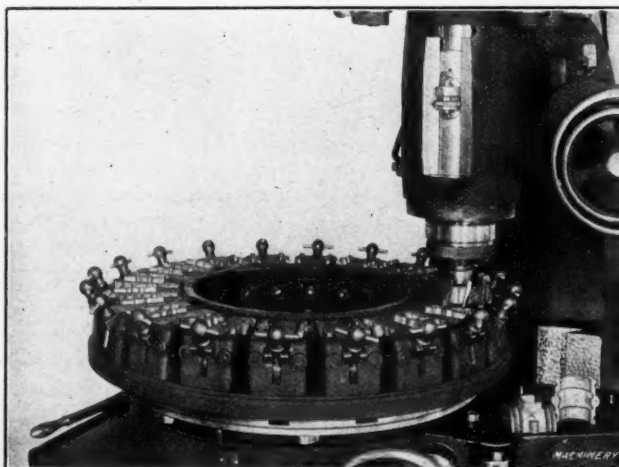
Fixture of Type used for milling Parts Nos. IV and V in Fig. 2
